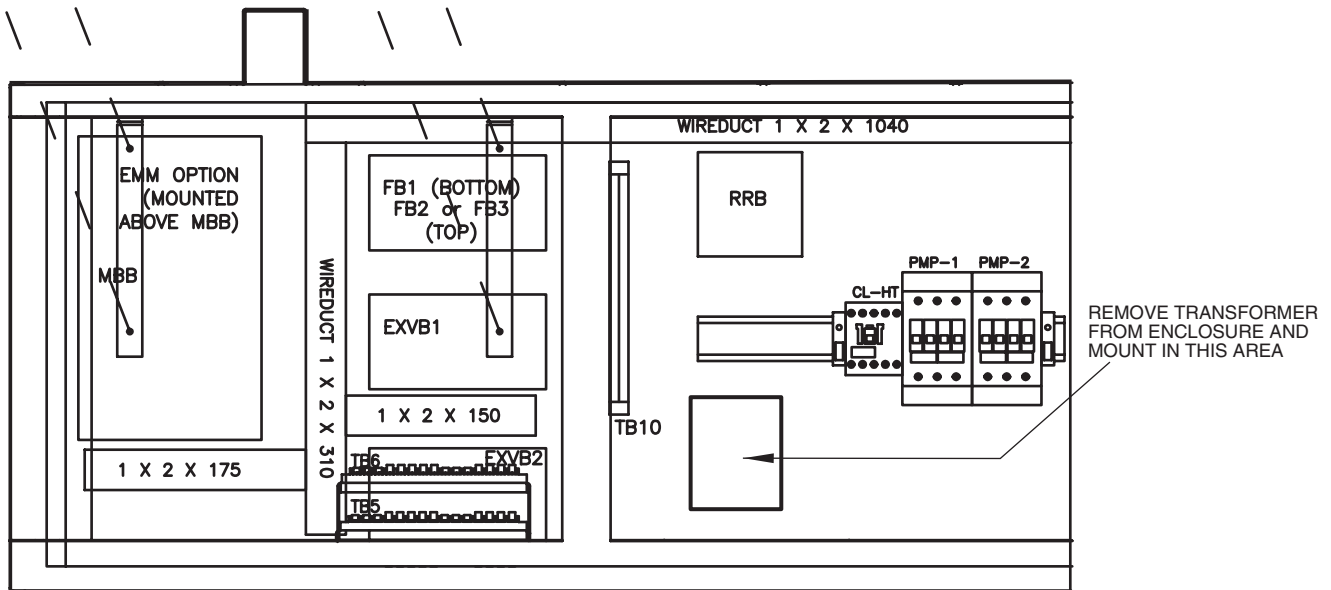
Transformer Enclosure Mounting, Sizes 060-120 (460,575 V) and 060,070 (208/230 V)
